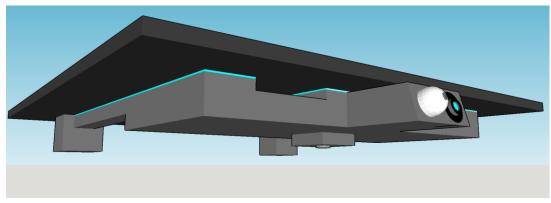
Bottom view, showing the speaker port and weight sensors
